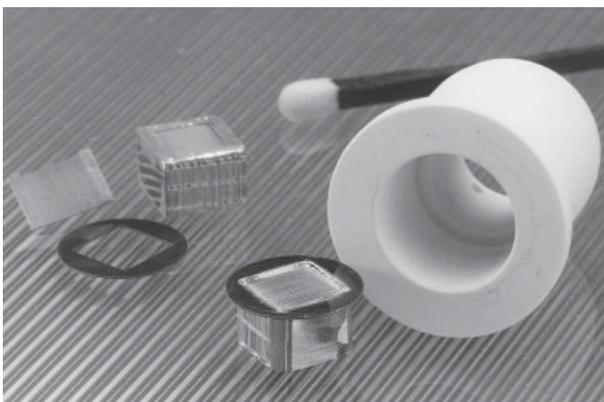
Photograph of welded stacks of Rh platelets and supporting parts [3].
